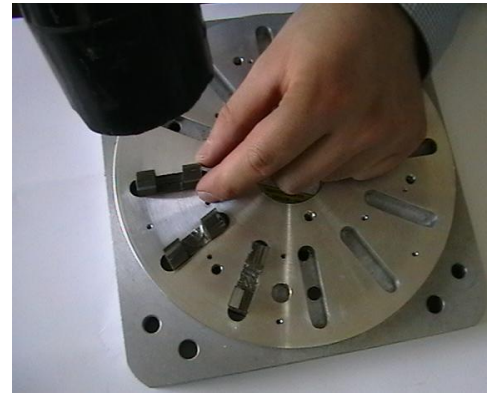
Inserting the stator cores into the machined cavities of the stator holder.
